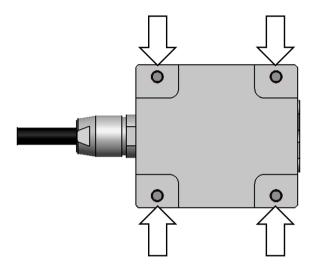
M2.5 holes in the bottom of the S-335 for mounting onto a surface
